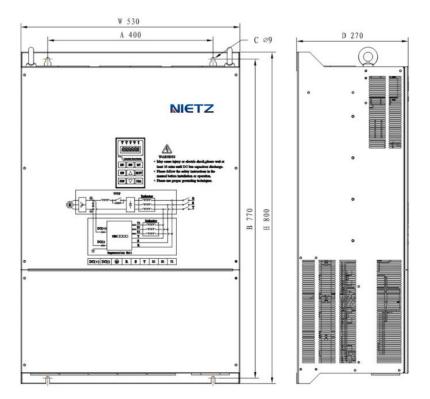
C6 wall-mounted chassis dimensions and installation dimensions
